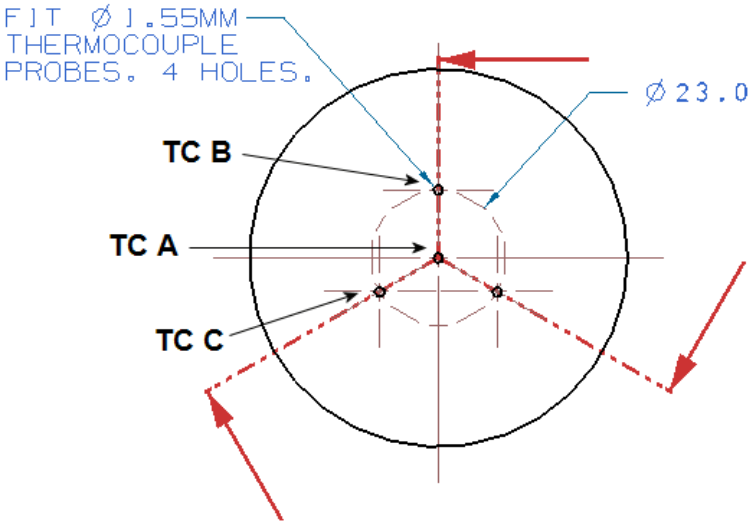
Top view showing the array of thermocouples in the test chamber.
